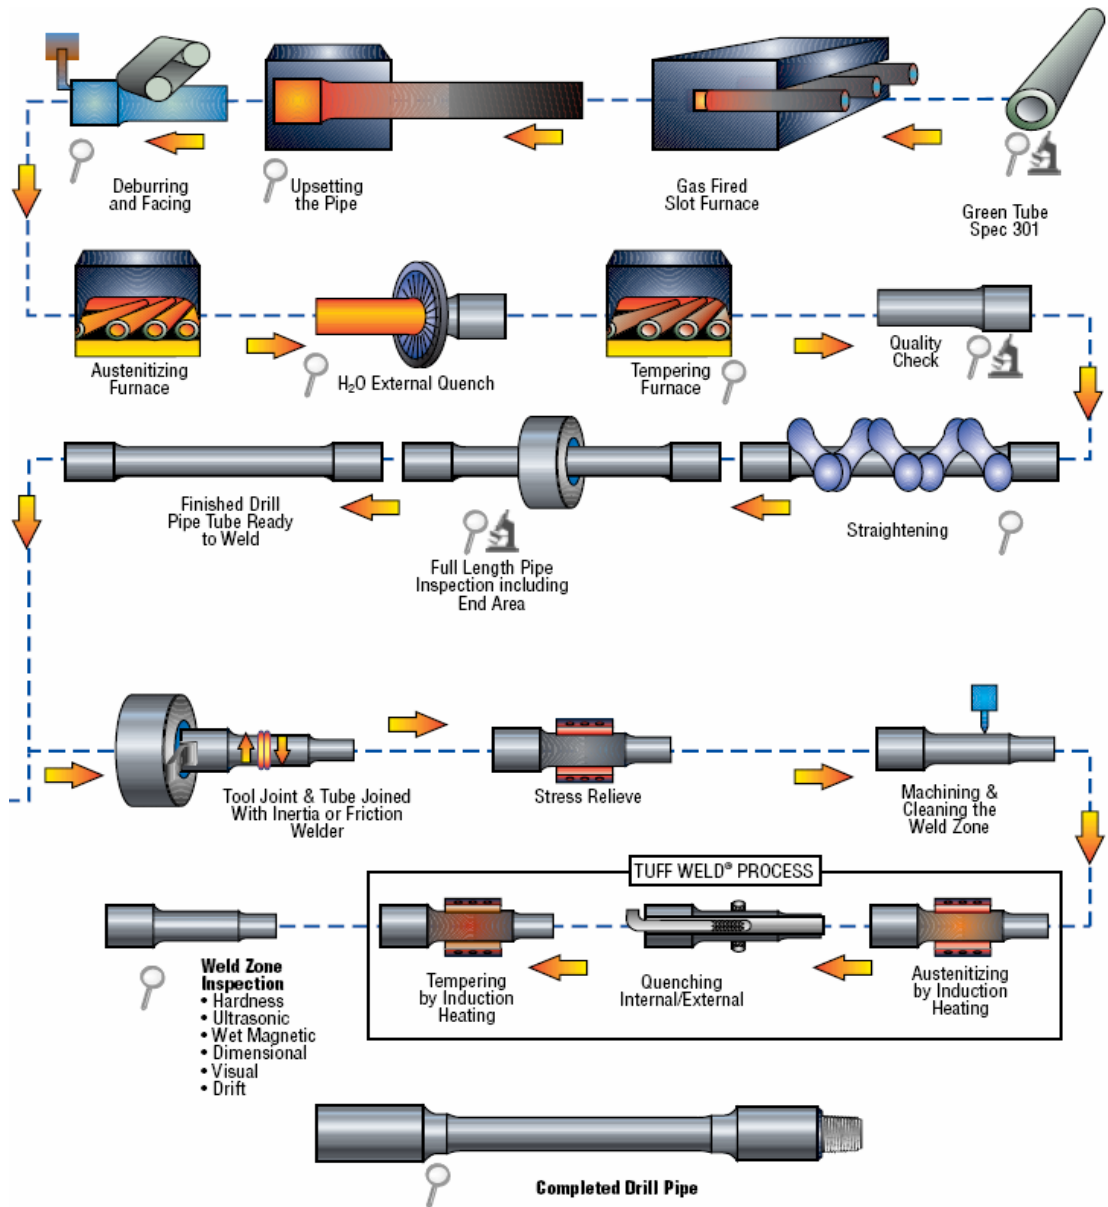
Manufacturing process of drillpipe including welding^[2]
